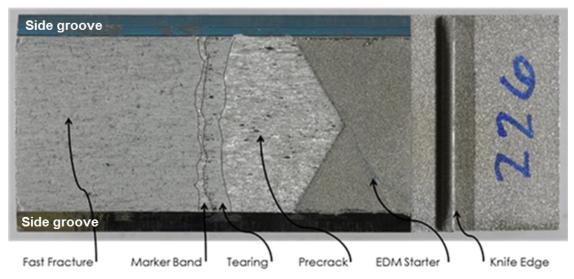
Photomicrograph of Fracture Surface of T-L Fracture Specimen from Coupon Blank M2
